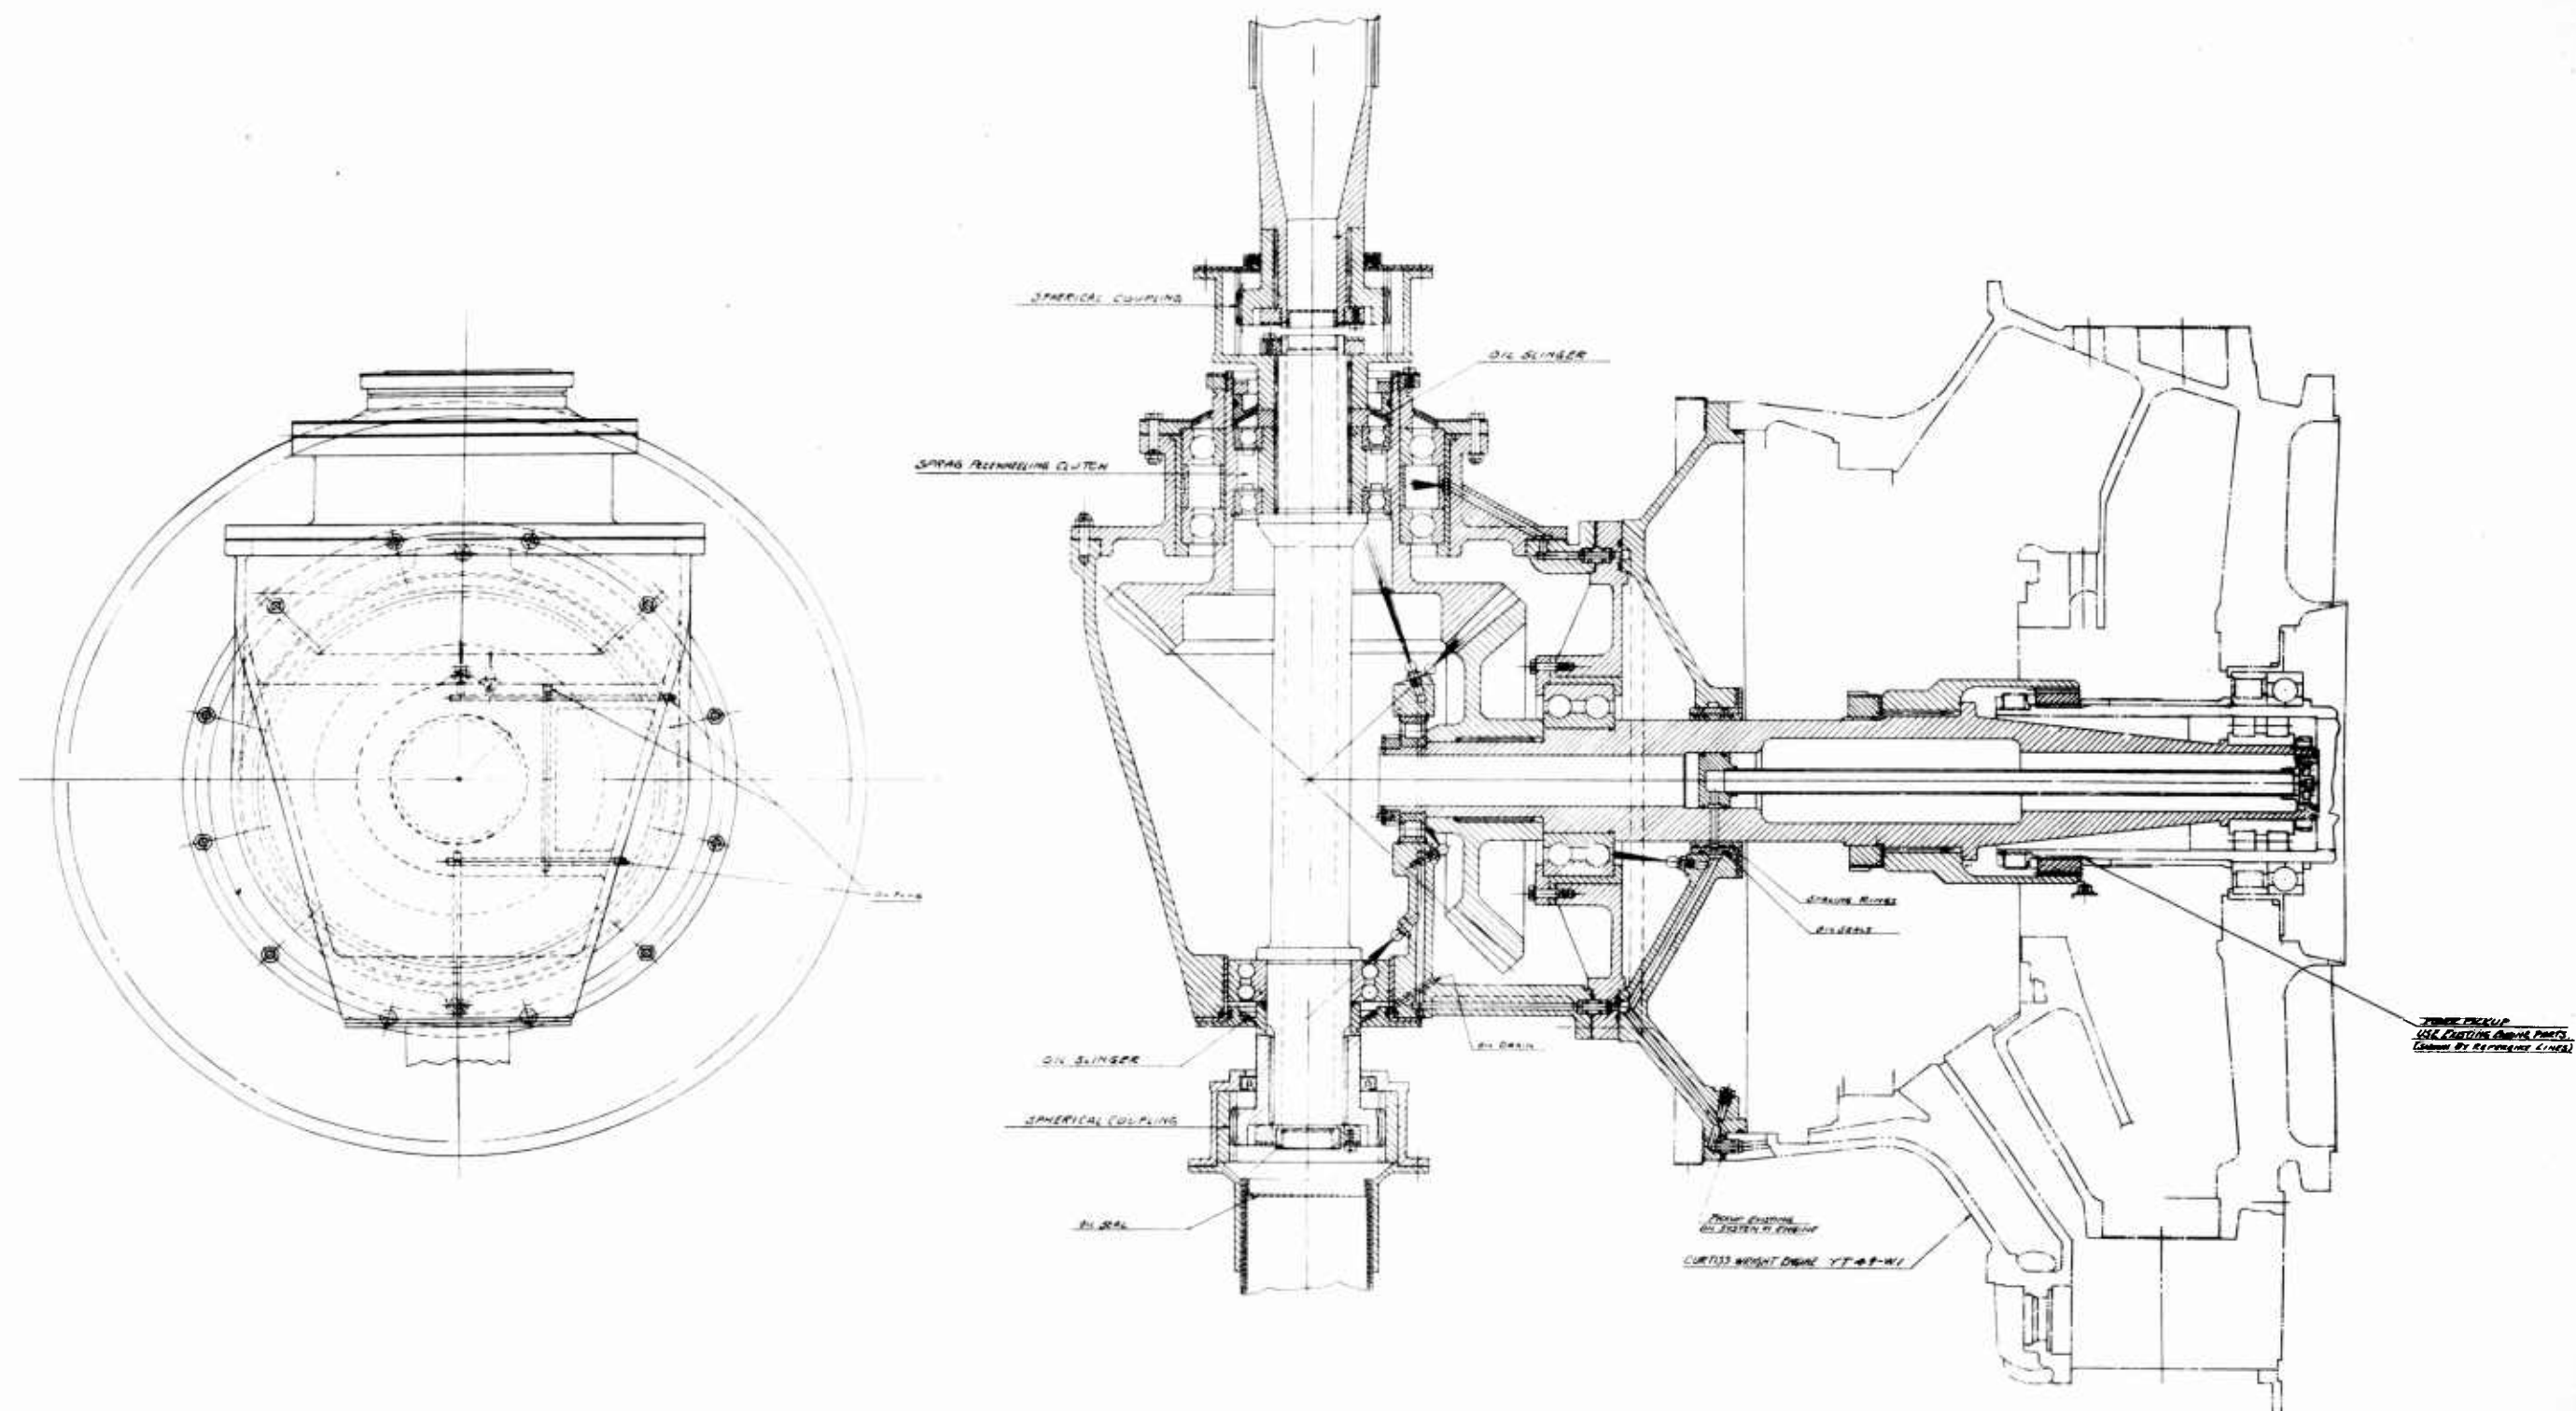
Dwg. No. D181-960-006: T-49 Engine Gear Box (Twin Duct)
